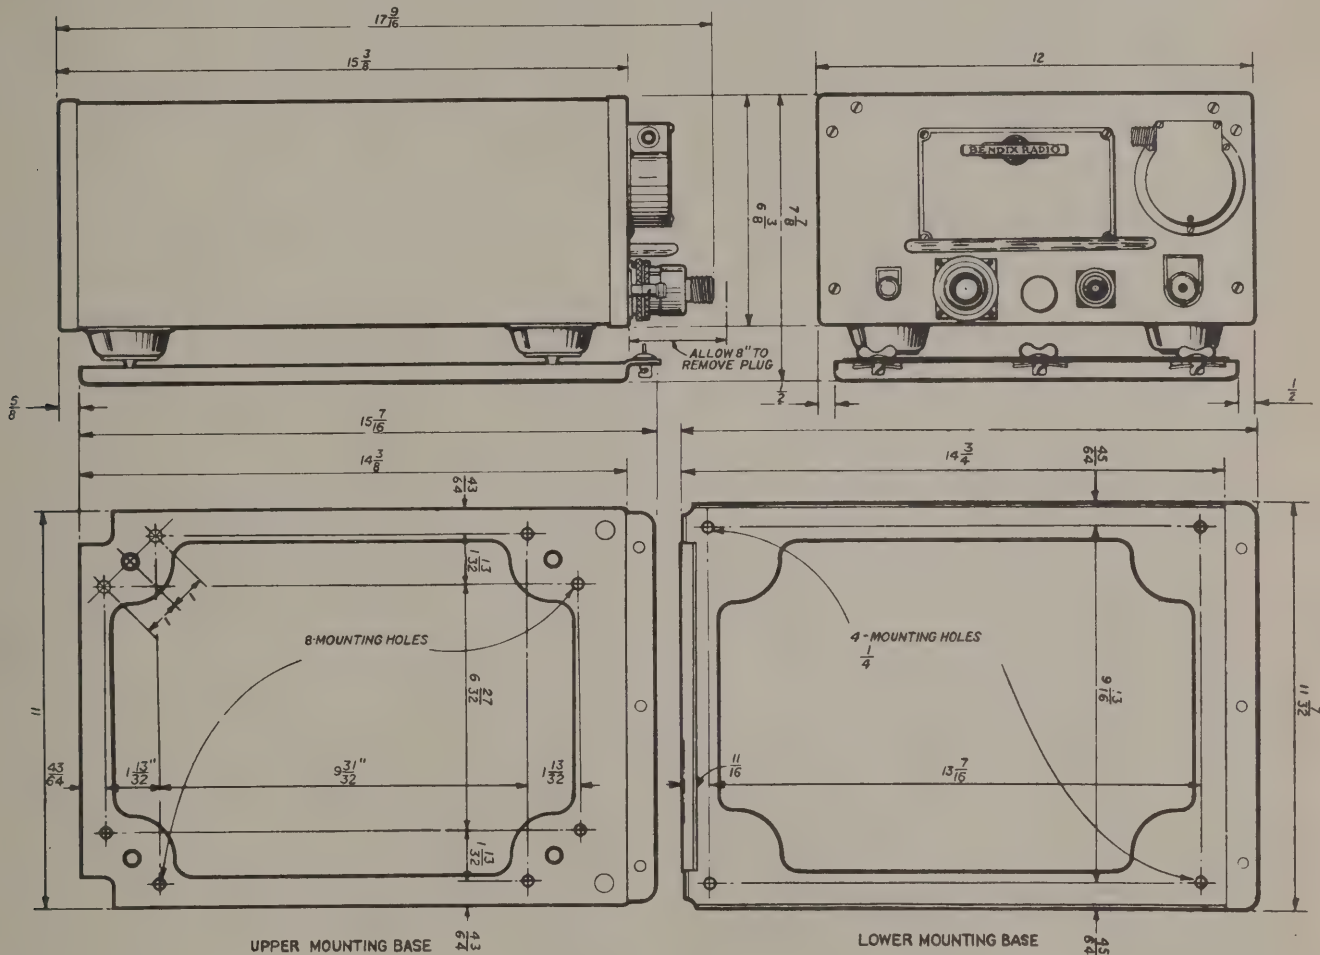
Type MN-26* Radio Compass, Outline and Mounting Dimensions
